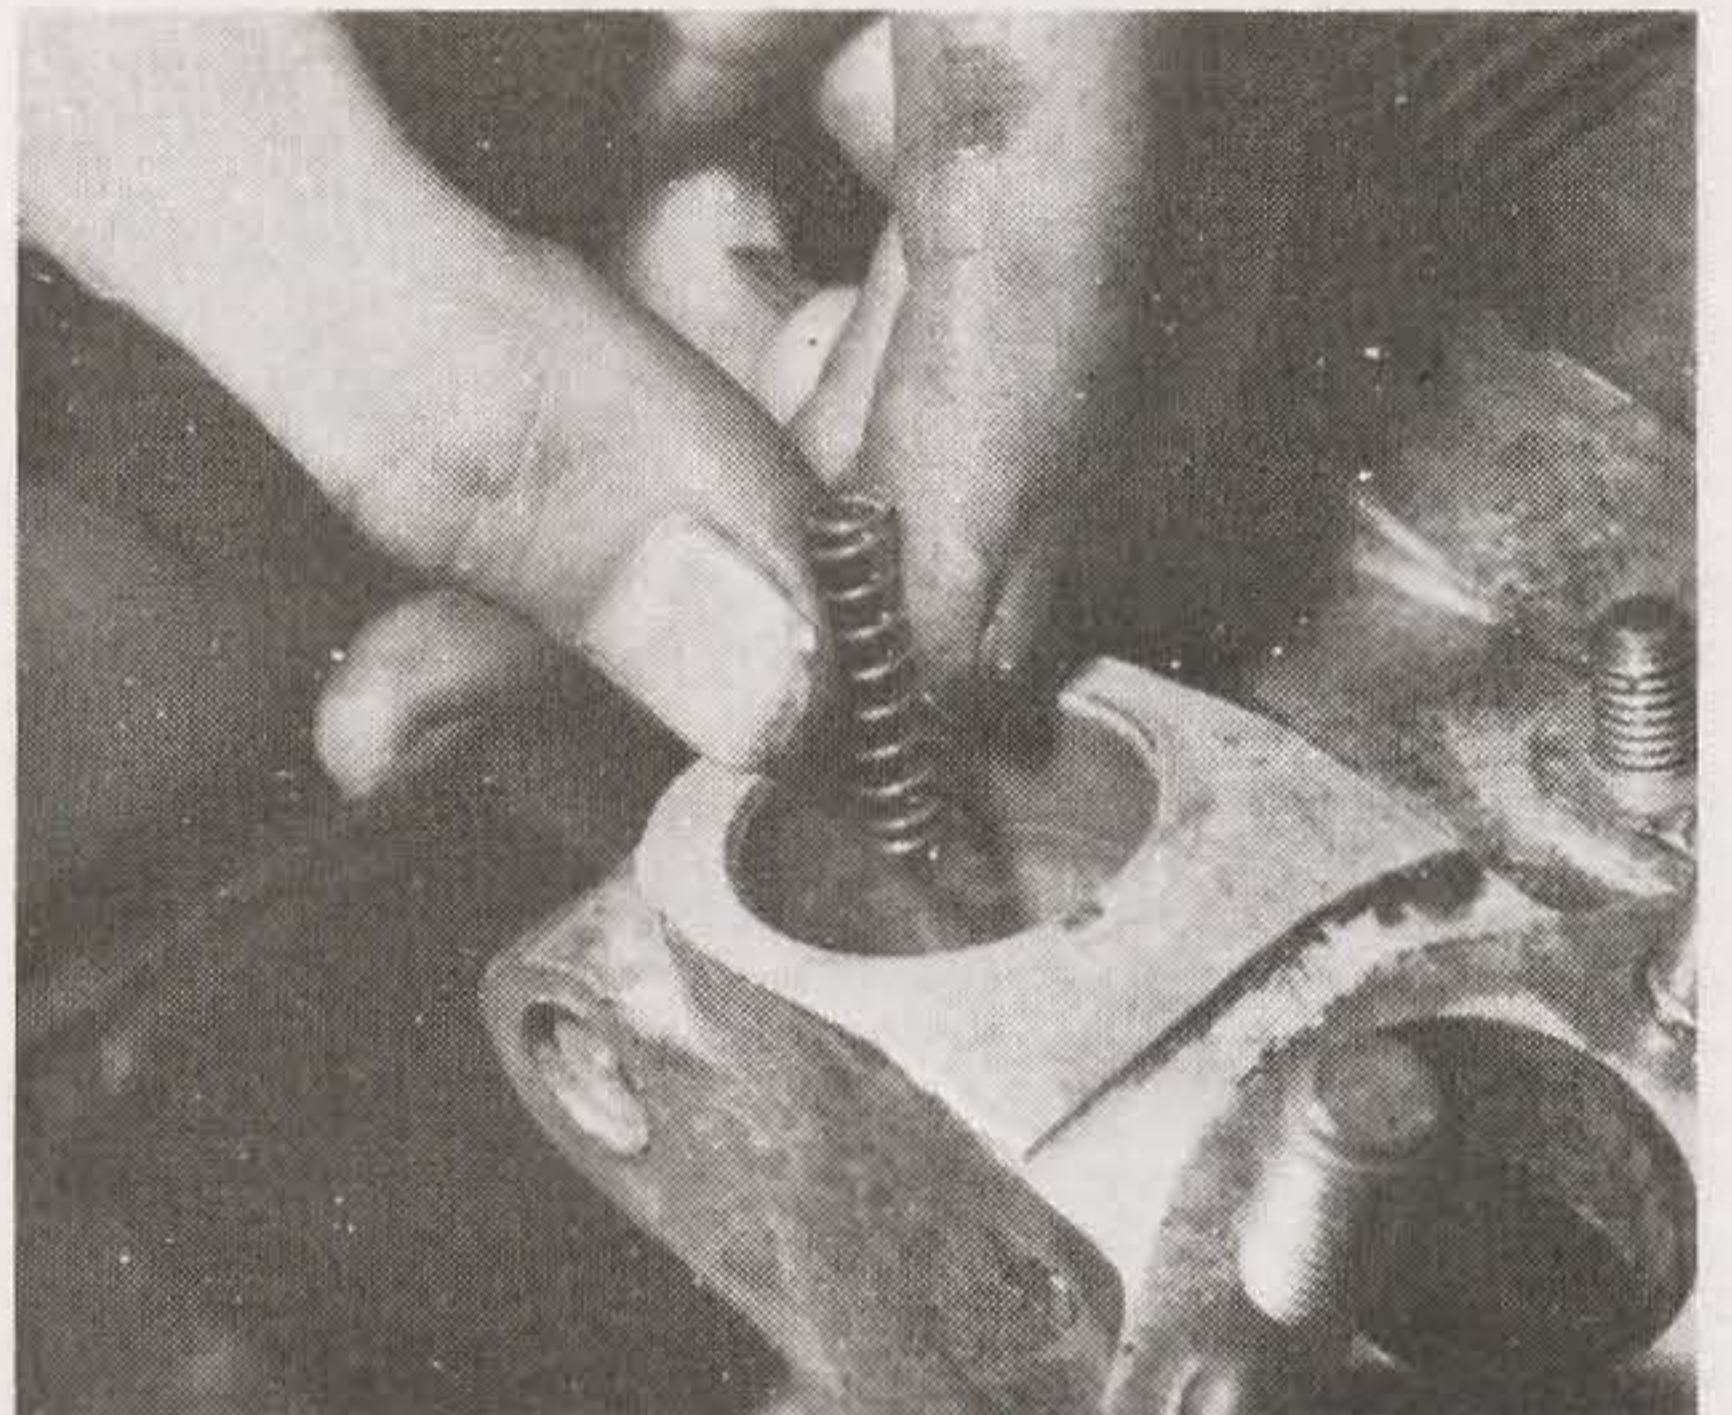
DISTRIBUTOR DRIVE SHAFT (Sec 6)
